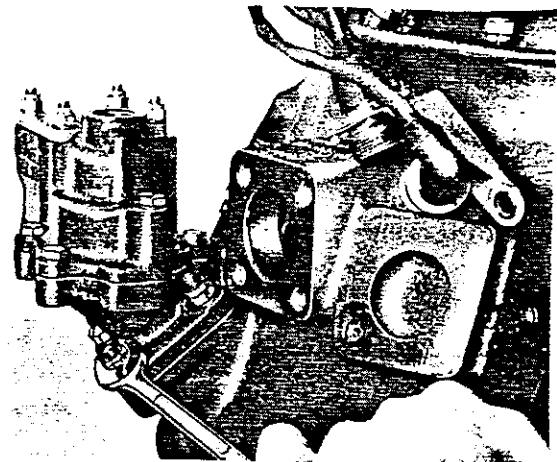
Tightening Overspeed Governor and Tachometer Drive Gearbox Nuts
